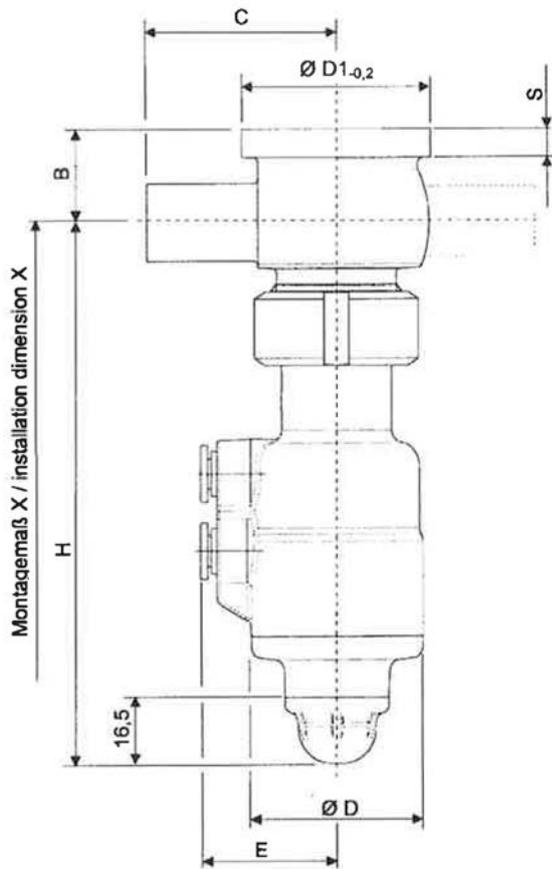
VESTA tank bottom valve H_A/T and H_A/T/M with housing for welding
